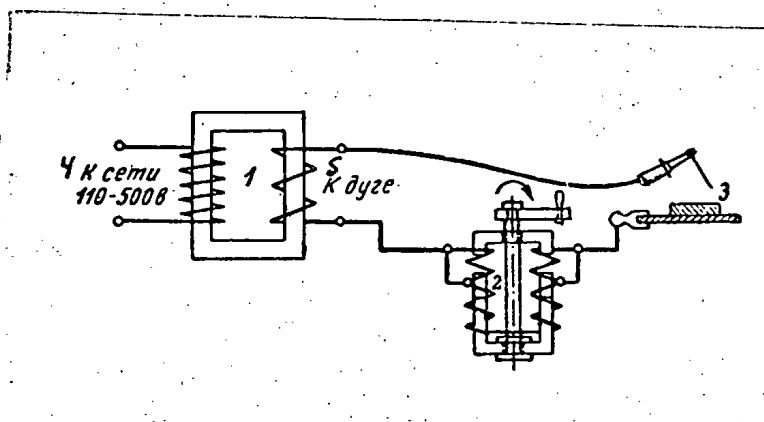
Elementary circuit of an a.c. welding device
